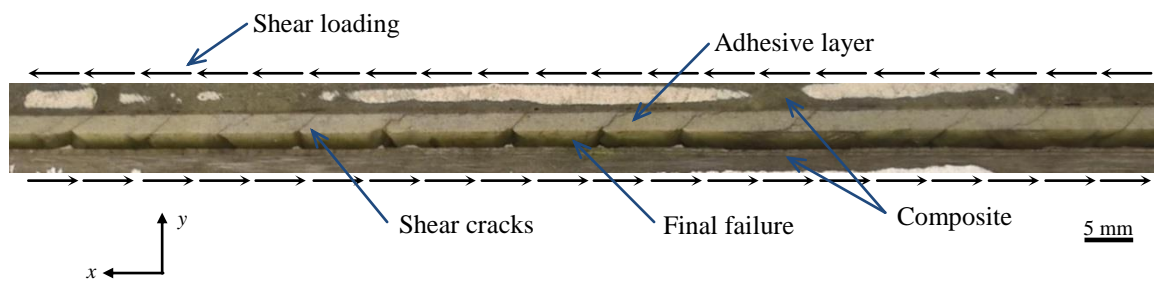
Shear cracks and failure observed in a 34 m SSP-blade.
